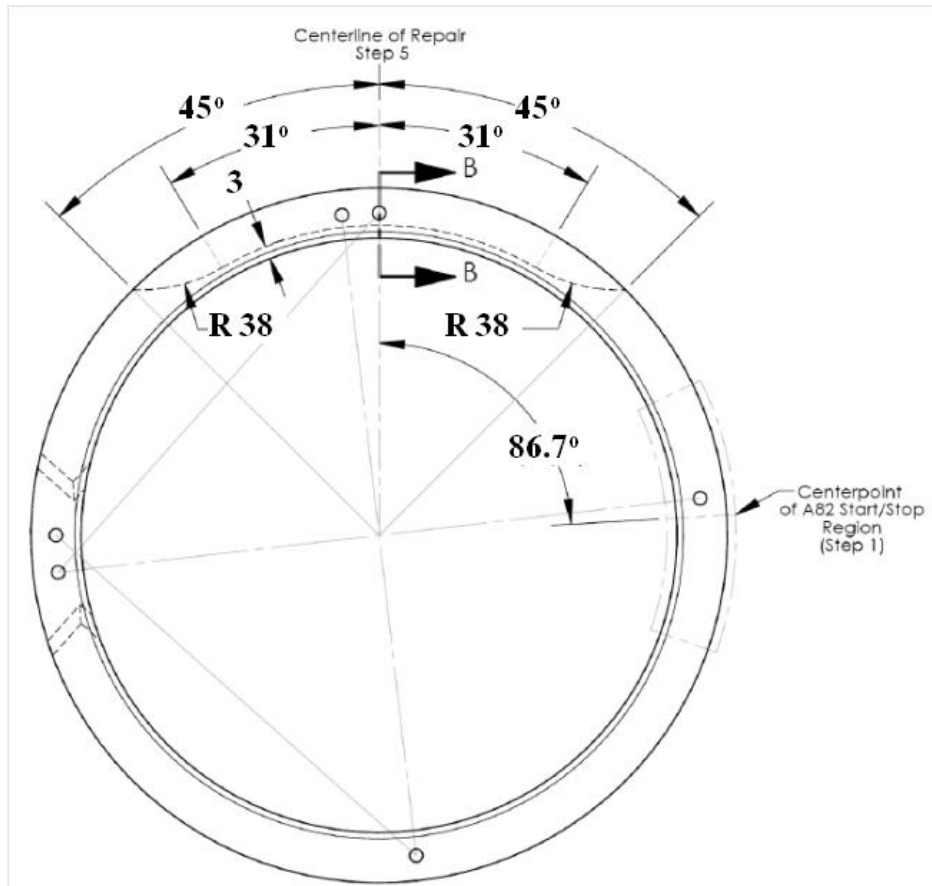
Cylinder C-5 Repair Weld Geometry (Courtesy: EPRI)
